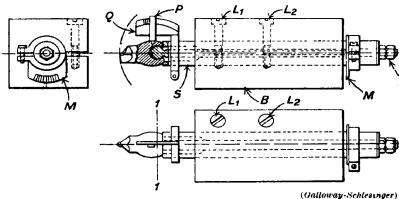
ADJUSTABLE DIAMOND TOOL-HOLDER
